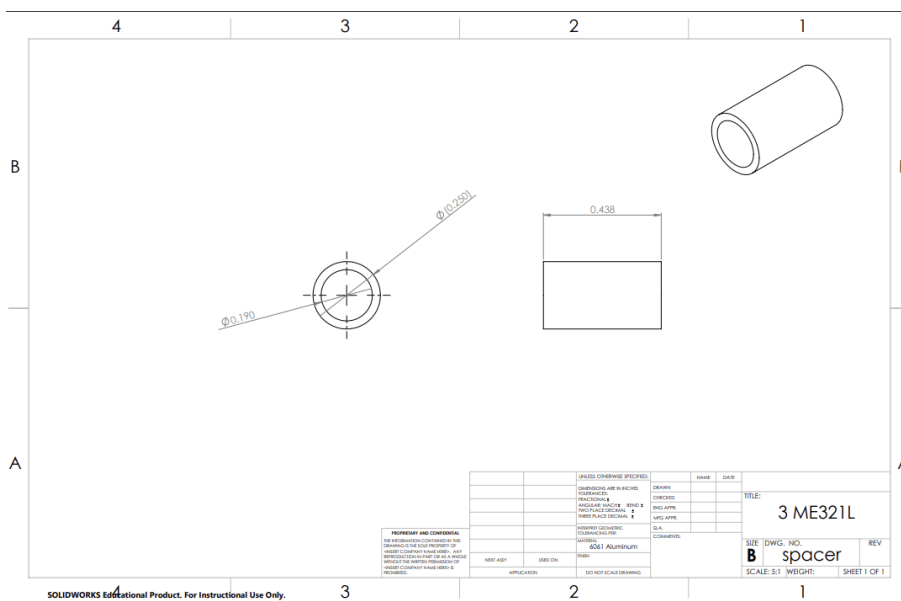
CAD fabrication drawing of support arm spacers. All dimensions in mm.
